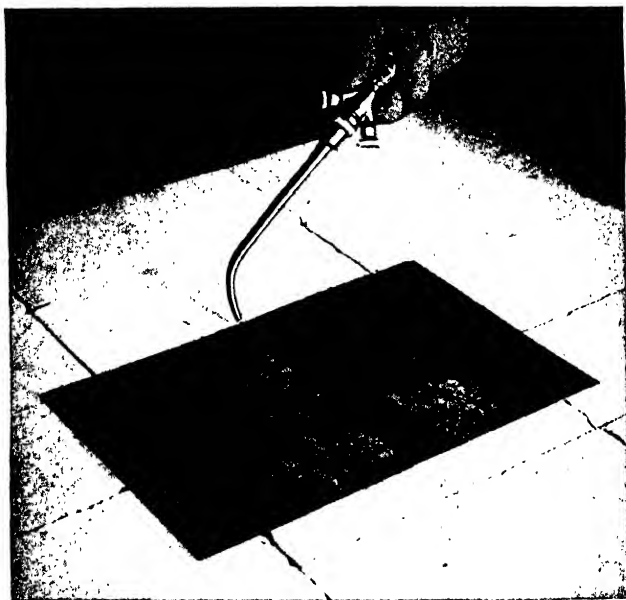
Lesson 2. Practice butt weld.* Take two pieces of $\frac{1}{16}$ in. (16 gauge) sheet about 8 in. long and place them flat on the welding table with the edges just touching as shown. A firebrick or a piece of steel bar may be placed on each piece far enough from the edge so as not to interfere with the work. Adjust the welding blow pipe with the proper head and oxygen pressure and weld the seam from end to end. Move the blow pipe along in a straight line at just sufficient speed to fuse the edges together thoroughly. Be sure to fuse the metal through to the bottom of the sheet. Do not be disturbed if the finished weld is depressed a little below the surface of the two sheets. Even on a very good weld it probably will be; but in this exercise, the principal thing is to secure complete penetration between the edges. *In testing, examine under side.* There should be some small rounded beads, but all traces of the crack between the edges should be gone. Clamp work in a vise or along the edge of an anvil and hammer the piece down by striking the sheet on the top side. A good weld will bend through 90° without difficulty. Moreover a good weld will stand hammering flat after bending without breaking. If it break, over-heating is indicated.
